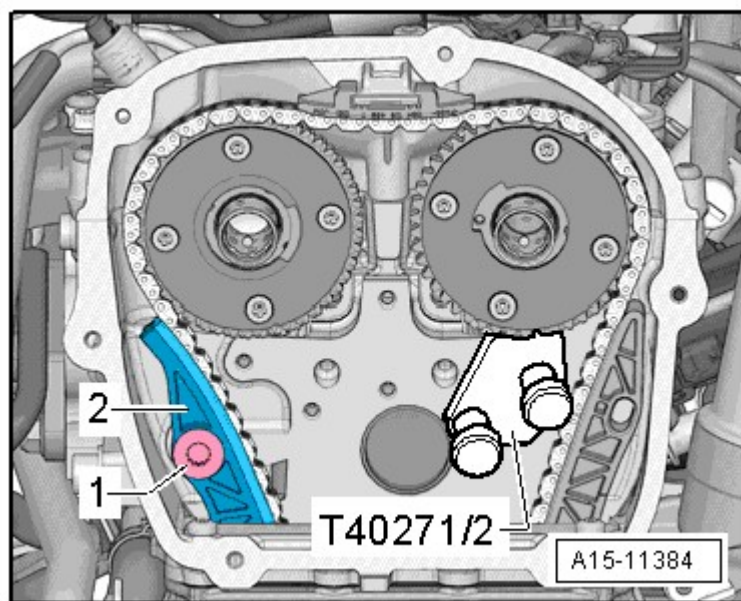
Moving Tensioning Rail Up To Install Bolt
